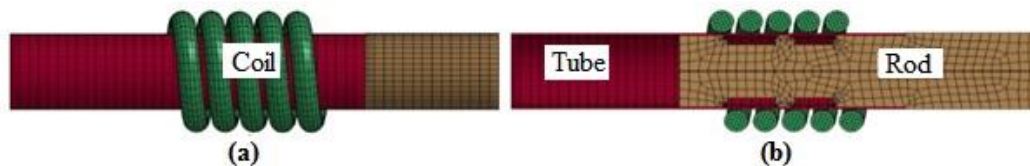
2 (a) Side view and (b) cross-sectional view of assembled parts
